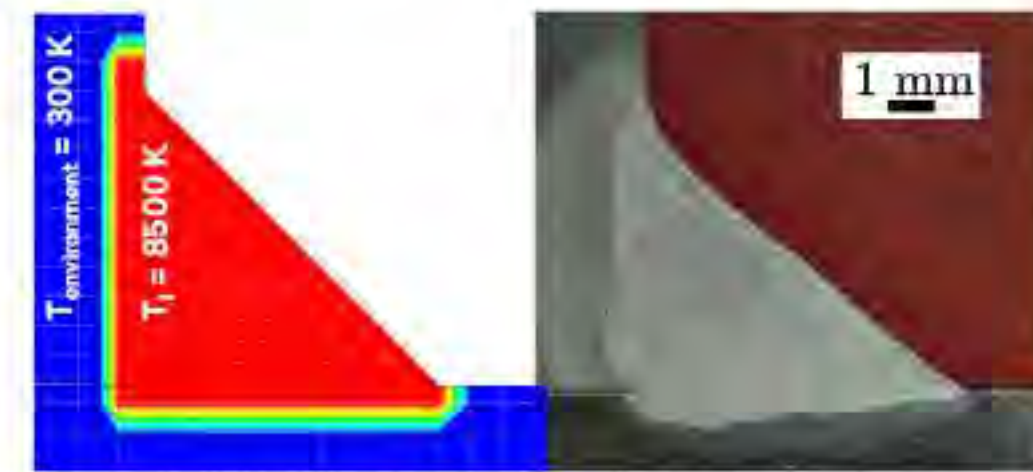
Numerical and experimental cross section of the weld seam
